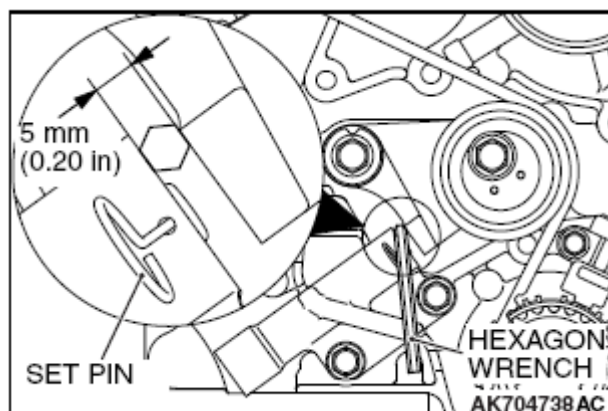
Identifying Hexagon Wrench Between Auto-Tensioner And Tensioner Arm
